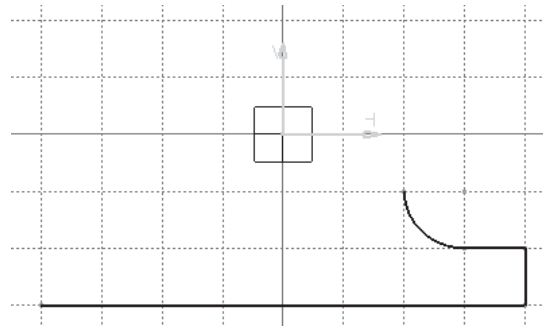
The sketch after drawing the three lines and a tangent arc
